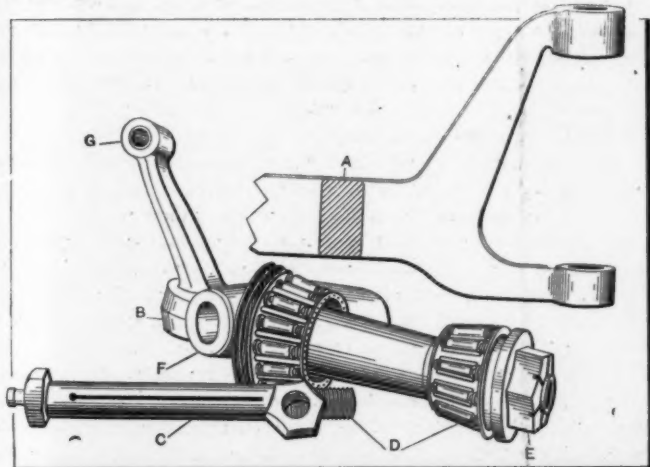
Knuckle end of front axle, knuckle, bearings and knuckle pin of special steel
